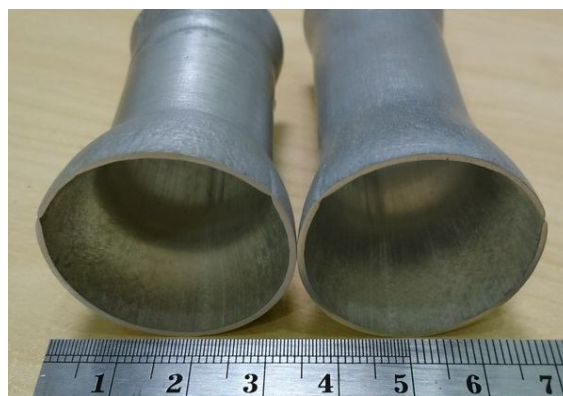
single layer tube formed of AA6061 in the HMGF process
